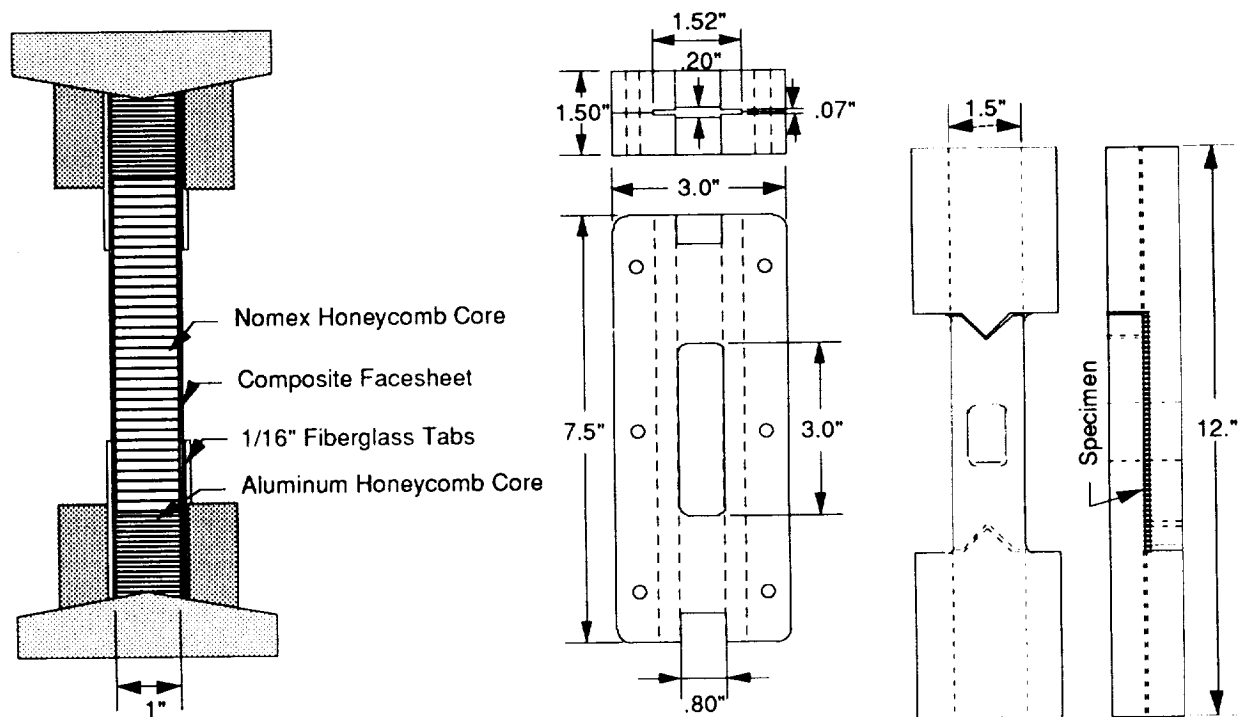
b Sandwich Column Specimen, Zabora Fixture and Boeing OHC Fixture .
